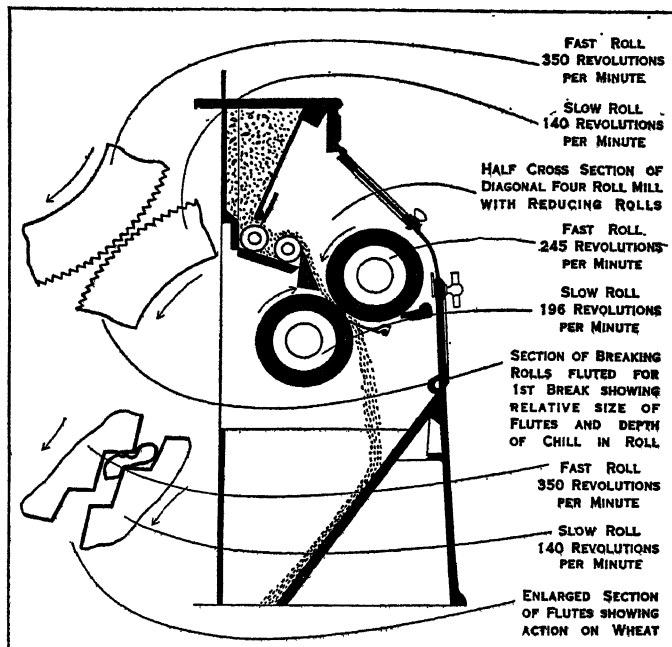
HALF CROSS-SECTION DIAGONAL ROLLER MILL (ENGLISH PRACTICE)
